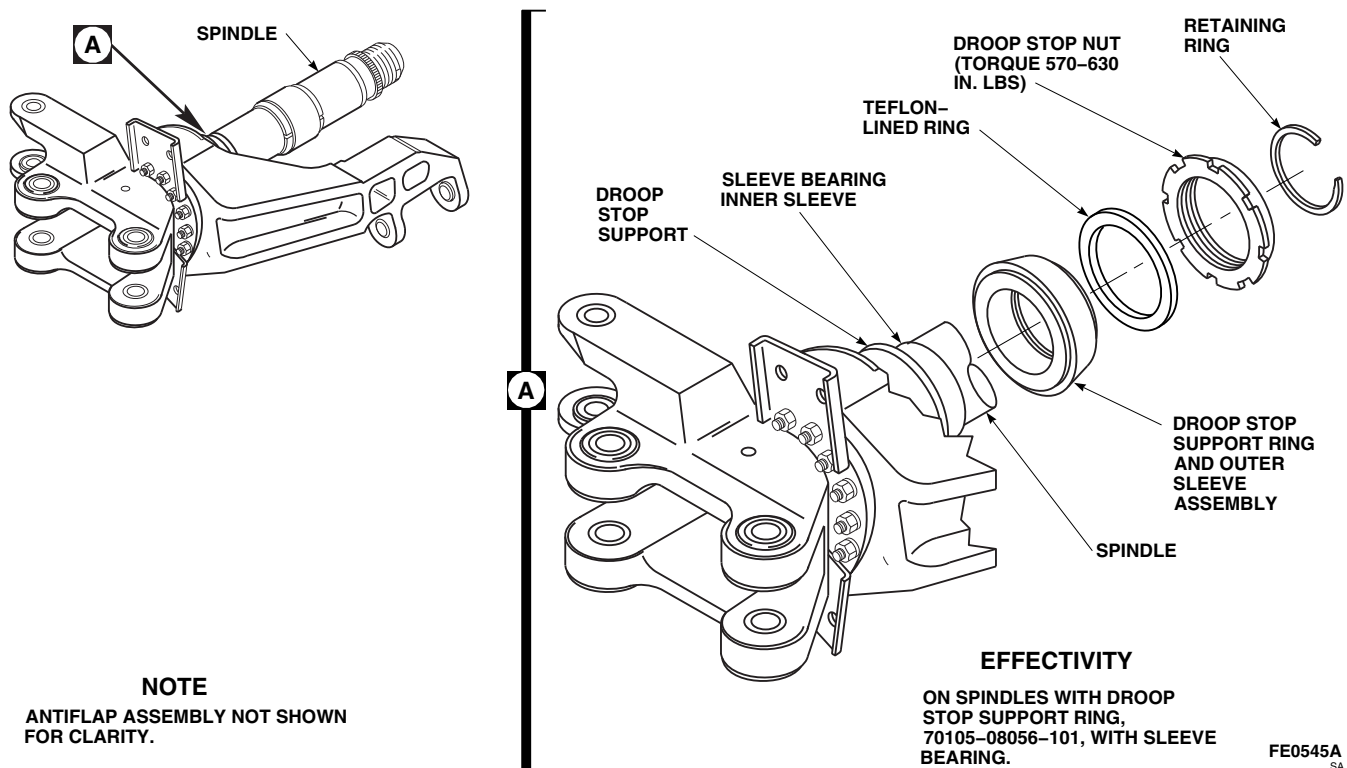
ACCESS SPINDLE HORN BOLTS
